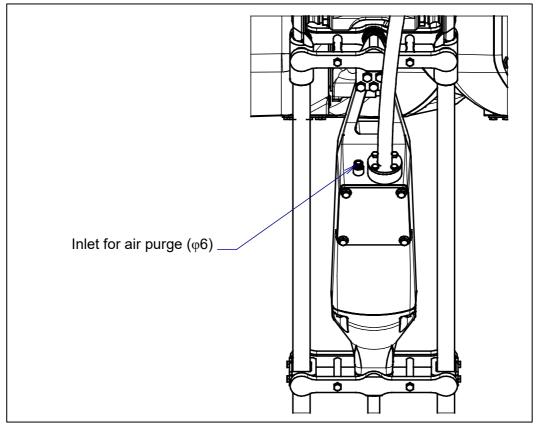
(b) Position of air for air purge on the robot wrist motor unit side
